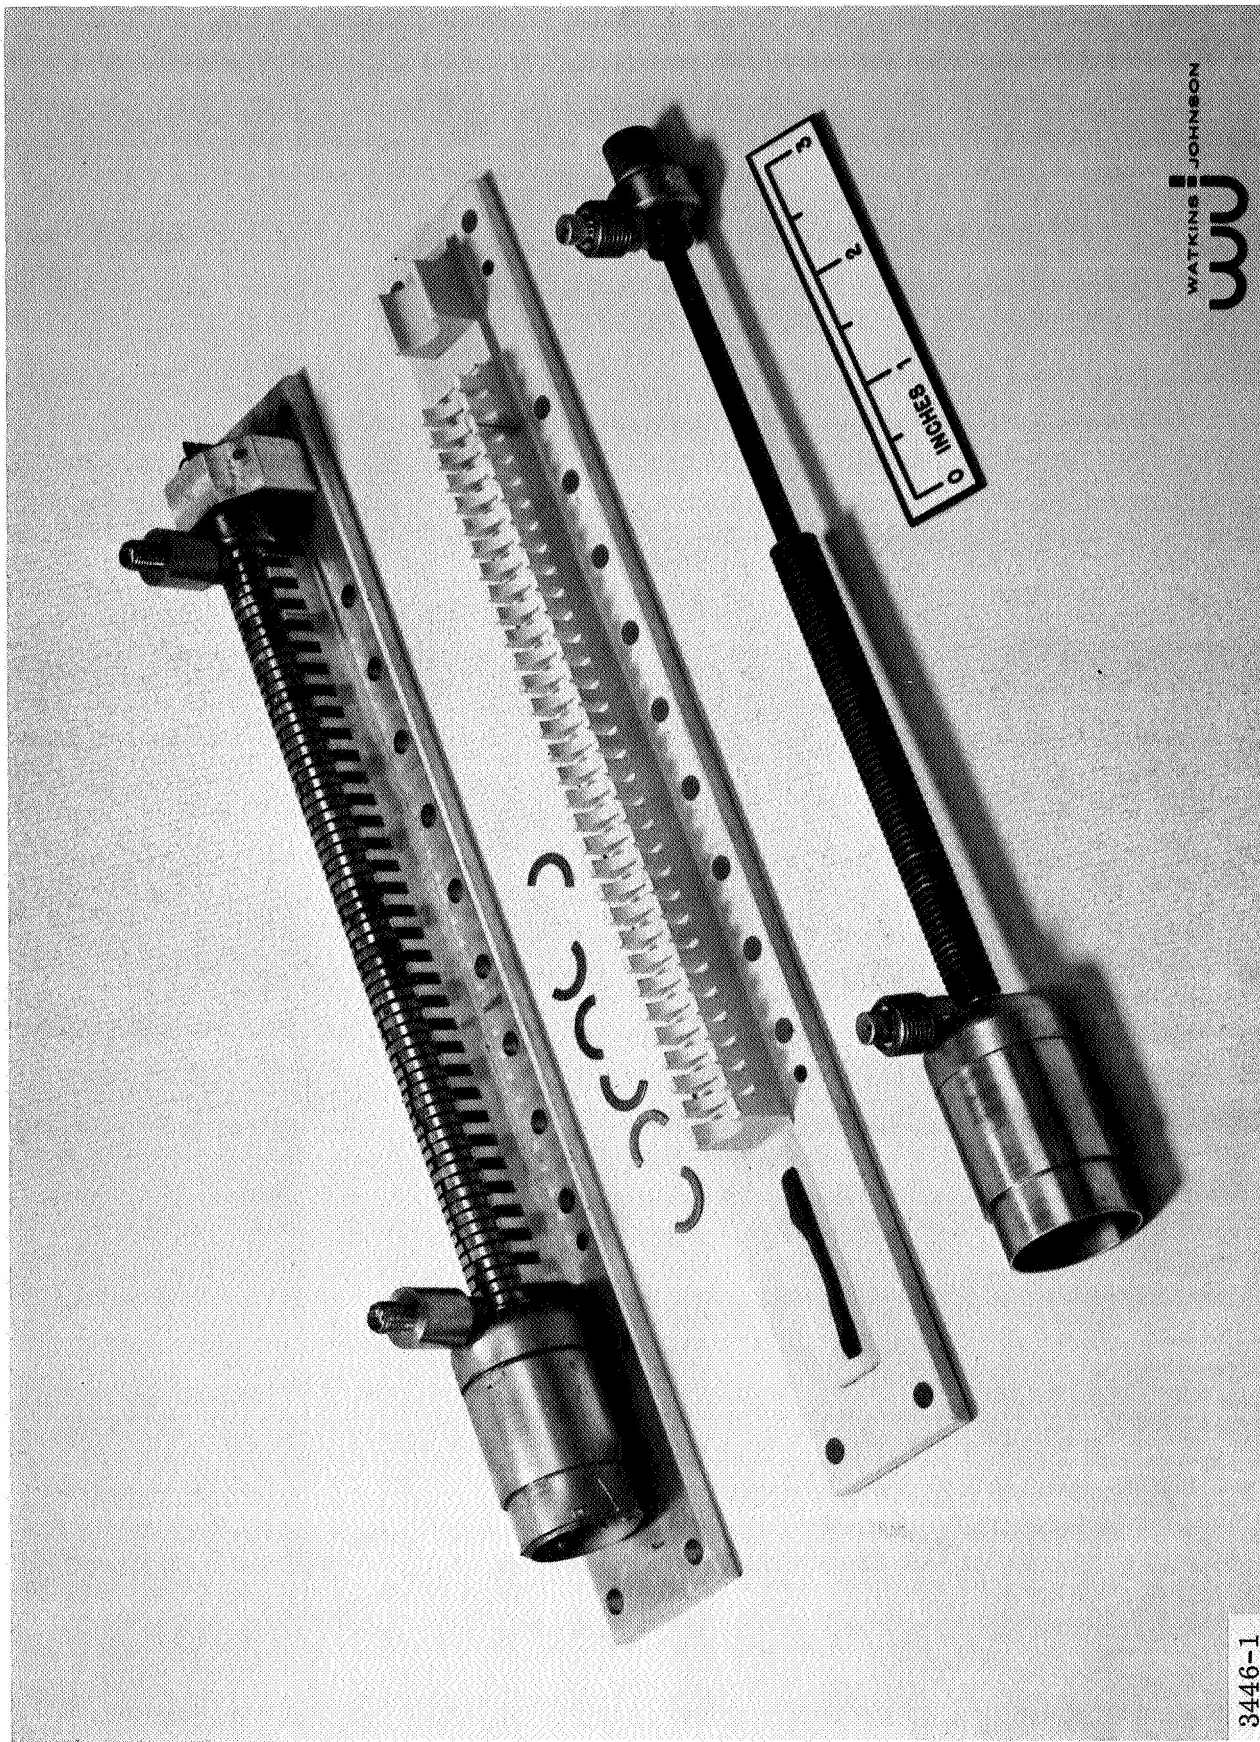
WJ-398 capsule parts. Also shown are samples of the Titanium mounting bolts, taper pins, and magnet support sleeves.
